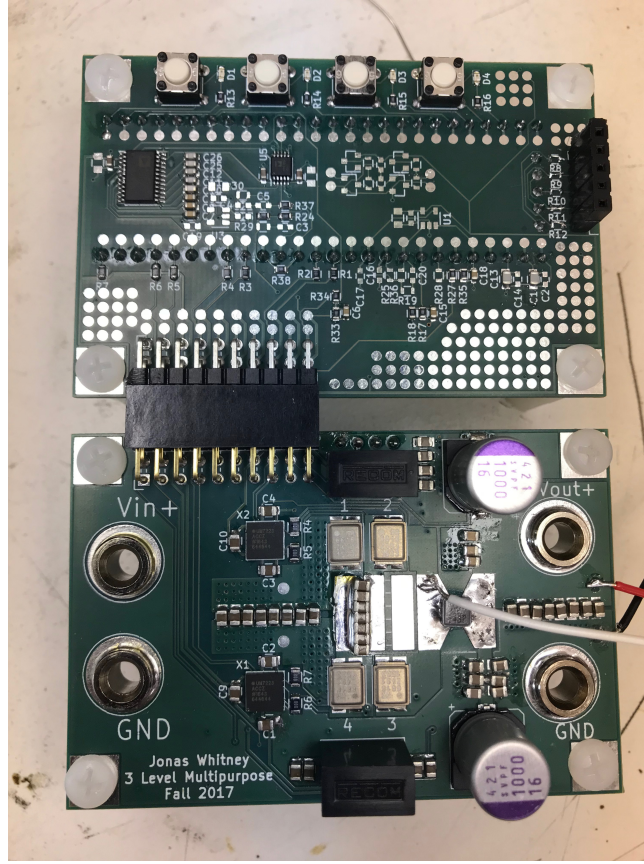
Top of the 3 Level Buck power PCB connected to a control PCB.
